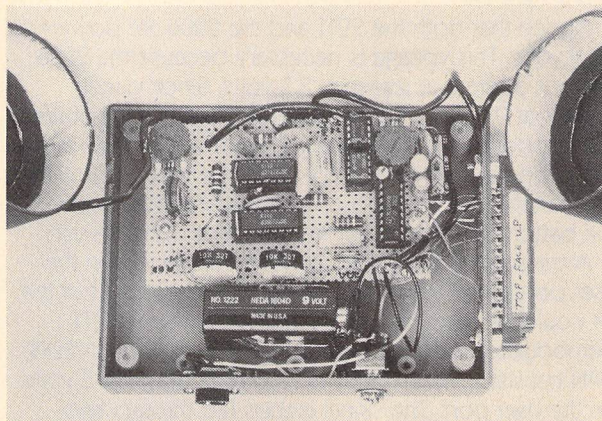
AUTHOR'S UNIT with cover removed reveals simplicity of wiring. Component placement is not critical and perfboard works well.
